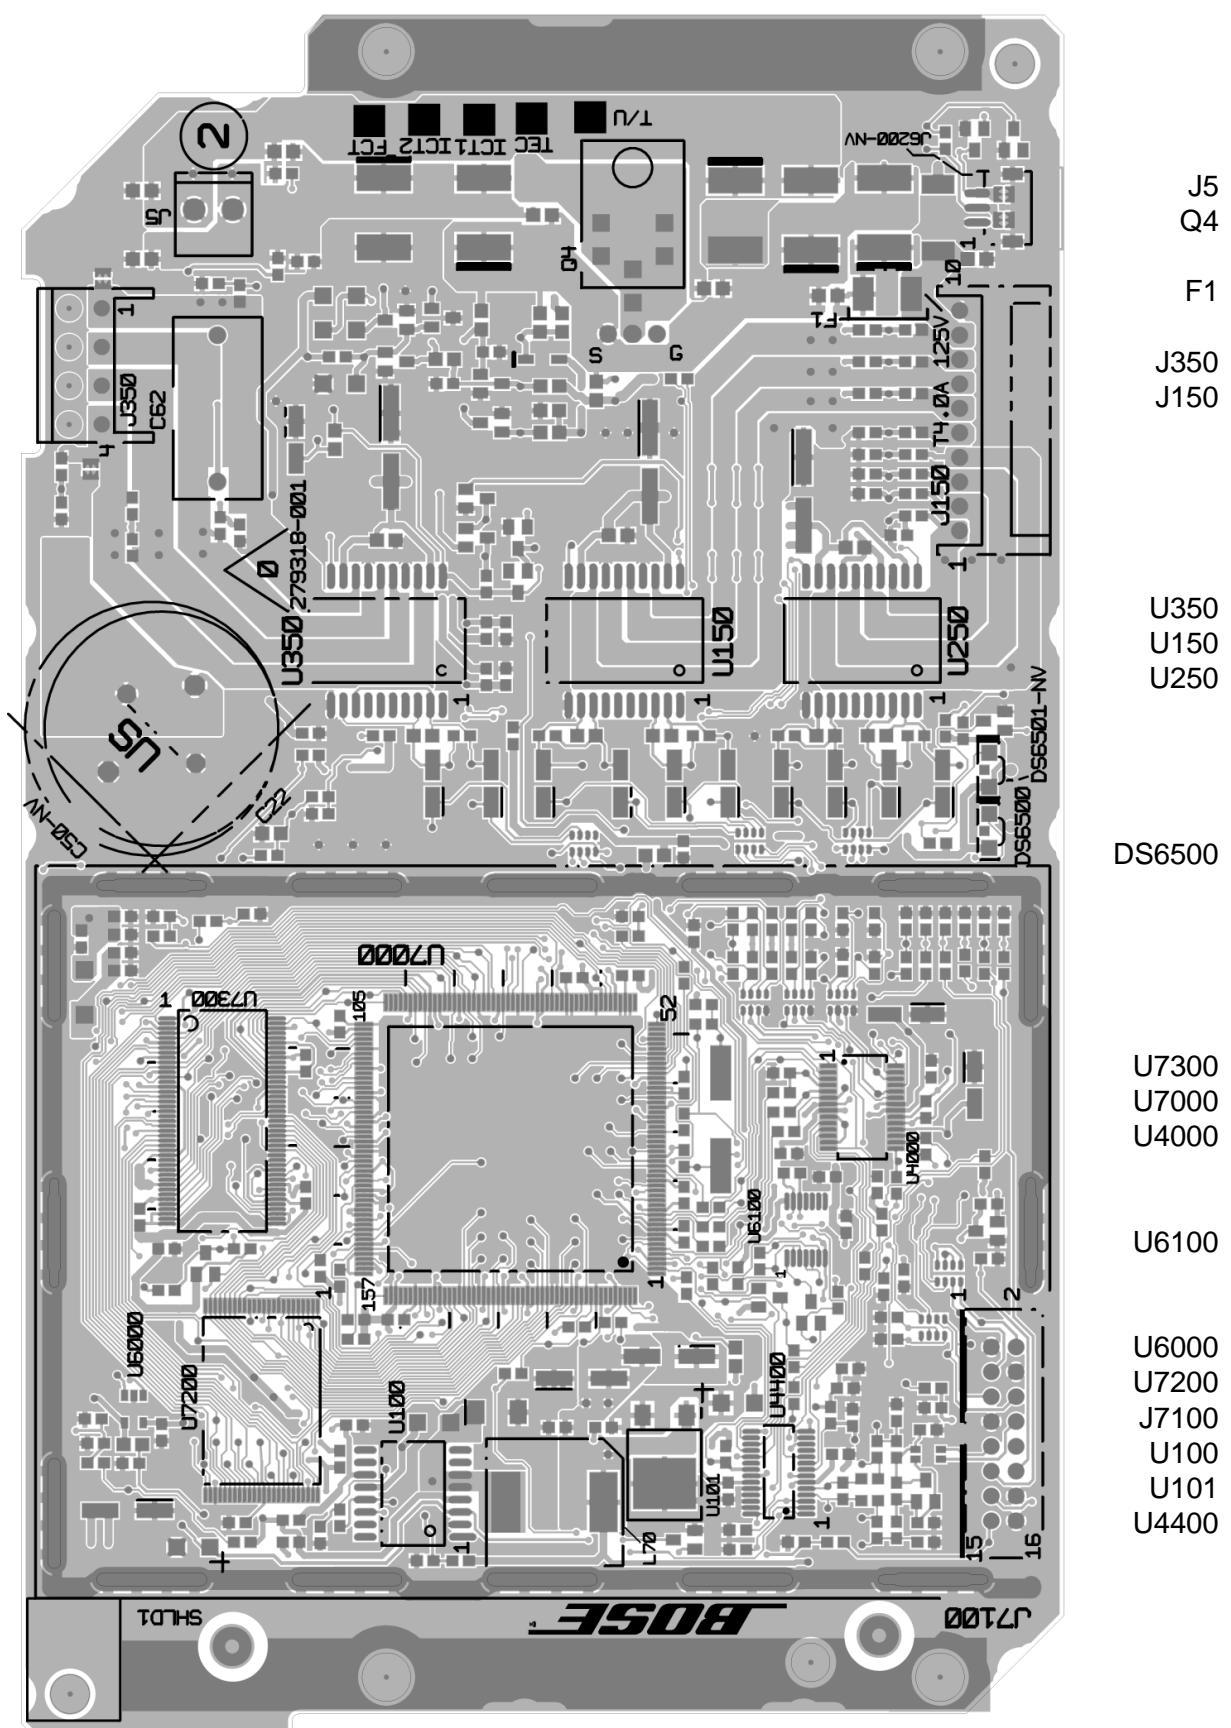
Bass Module DSP/Amplifier PCB Topside Etch Layout Diagram
